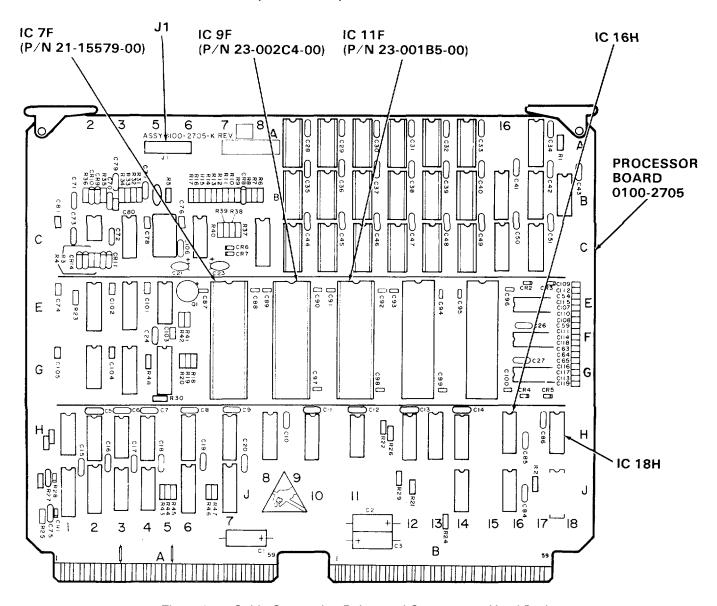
Cable Connection Points and Components Used During Processor Board Test (Sheet 1 of 2)
